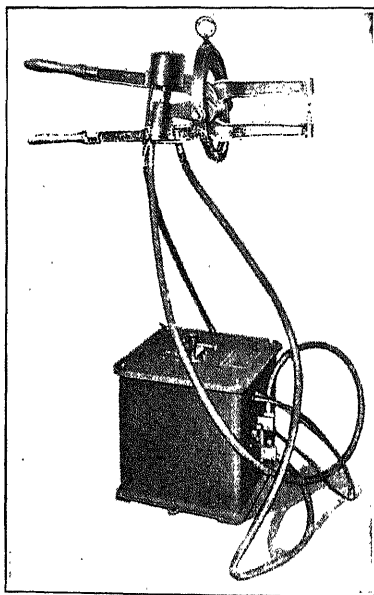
Winfield Portable Spot-Welding Machine.
